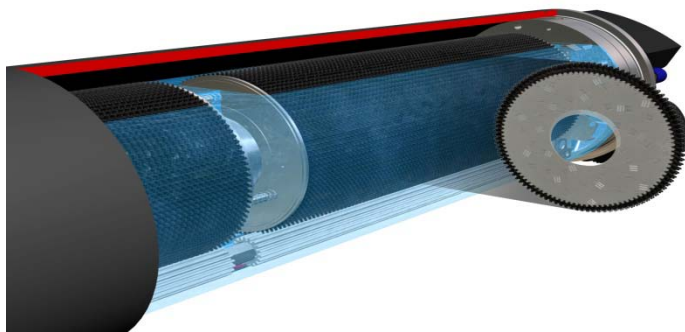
PBR construction, cross section. .(From www.netgrundfos.com)
